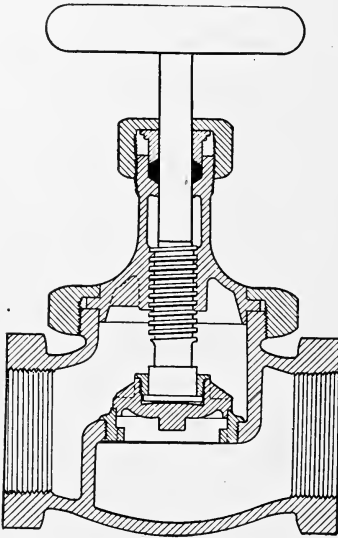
A Typical Globe Valve, Screw-top, Inside Screw.
